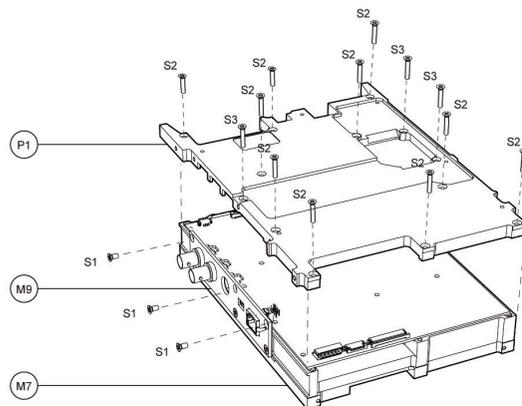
Remove MAINBOARD SHIELDING ASSY
